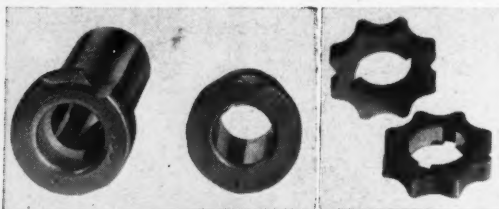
(Left) The finish and accuracy required in drill jig bushings can only be obtained economically by honing. Fig. 7—(Right) An example of carburized steel parts that are finished to fine limits by the use of the hone.
